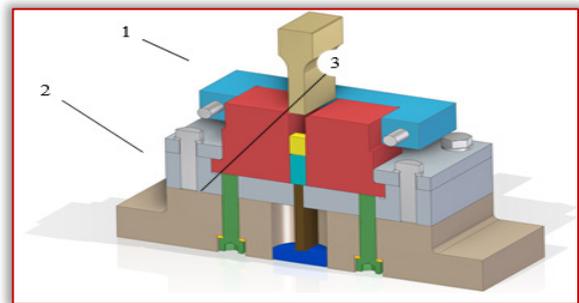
Section of the die CAD model; 1 - punch, 2 - mould, 3 - sample
